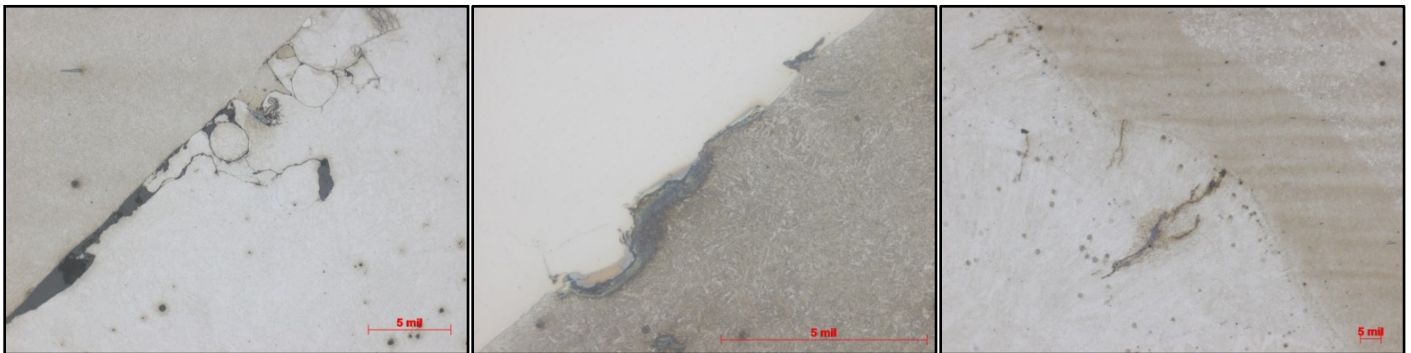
Common defects found in laser welding including unfused particles (left), lack of fusion (middle), and cracking (right). These defects were found in a weld made using powder based filler metal delivery. Porosity can be seen speckling each image.
